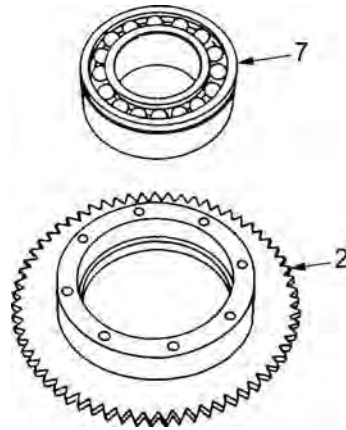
Bearing Installation on Input Oil Pump Drive Gear.
